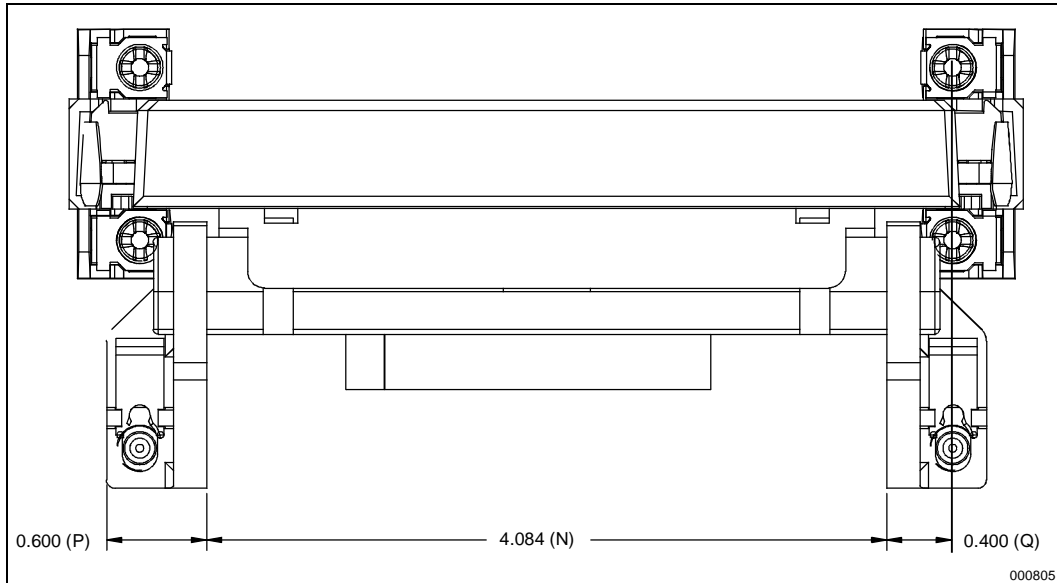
Top View Space Requirements for Boxed Processor Fan/Heatsink Supports
